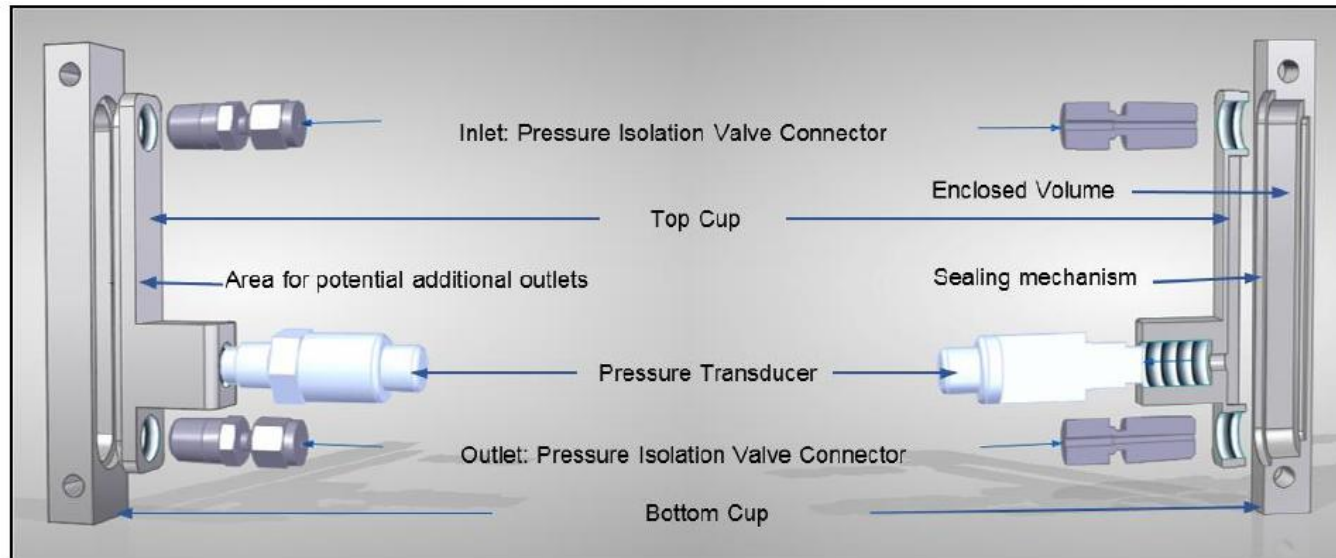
1 Plenum Chamber: Exploded and Exploded Sectional Side View
